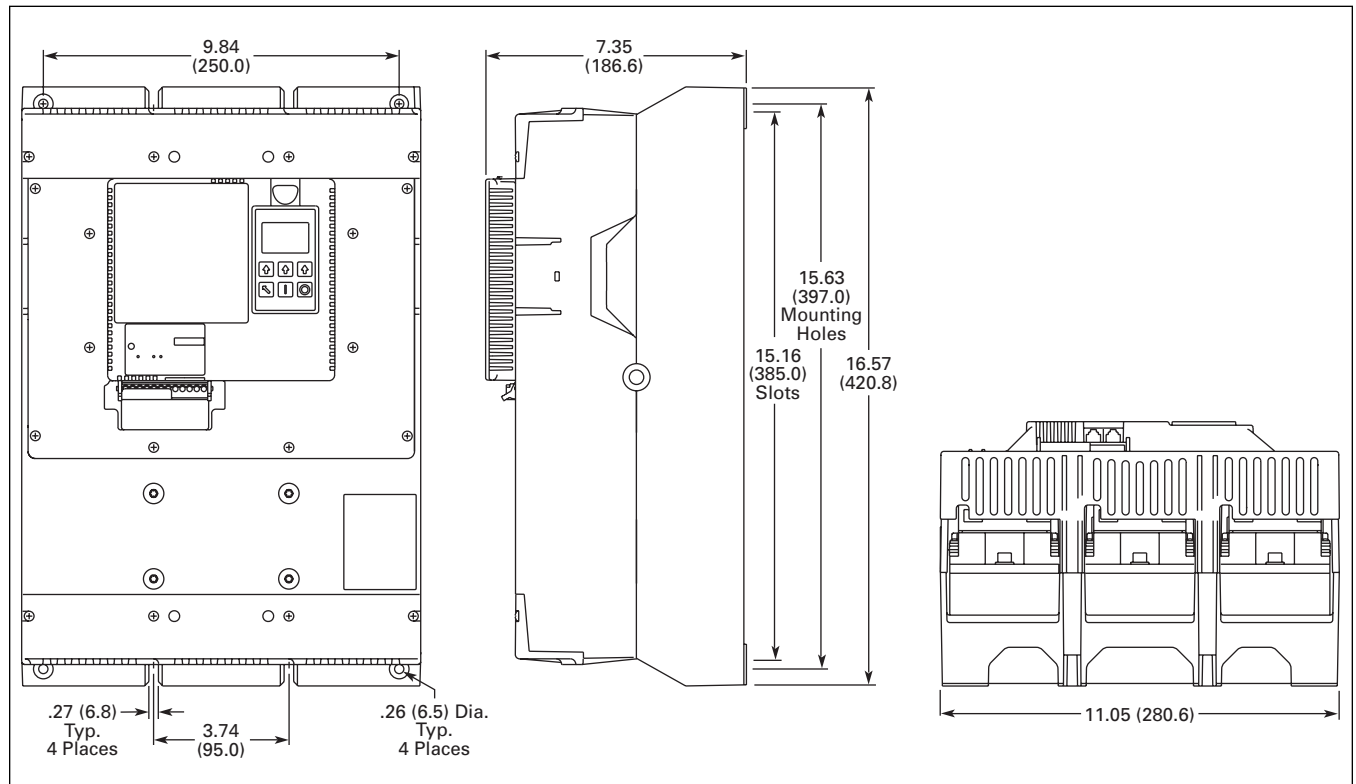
V-Frame (290 mm) S811 Approximate Dimensions in Inches (mm)
